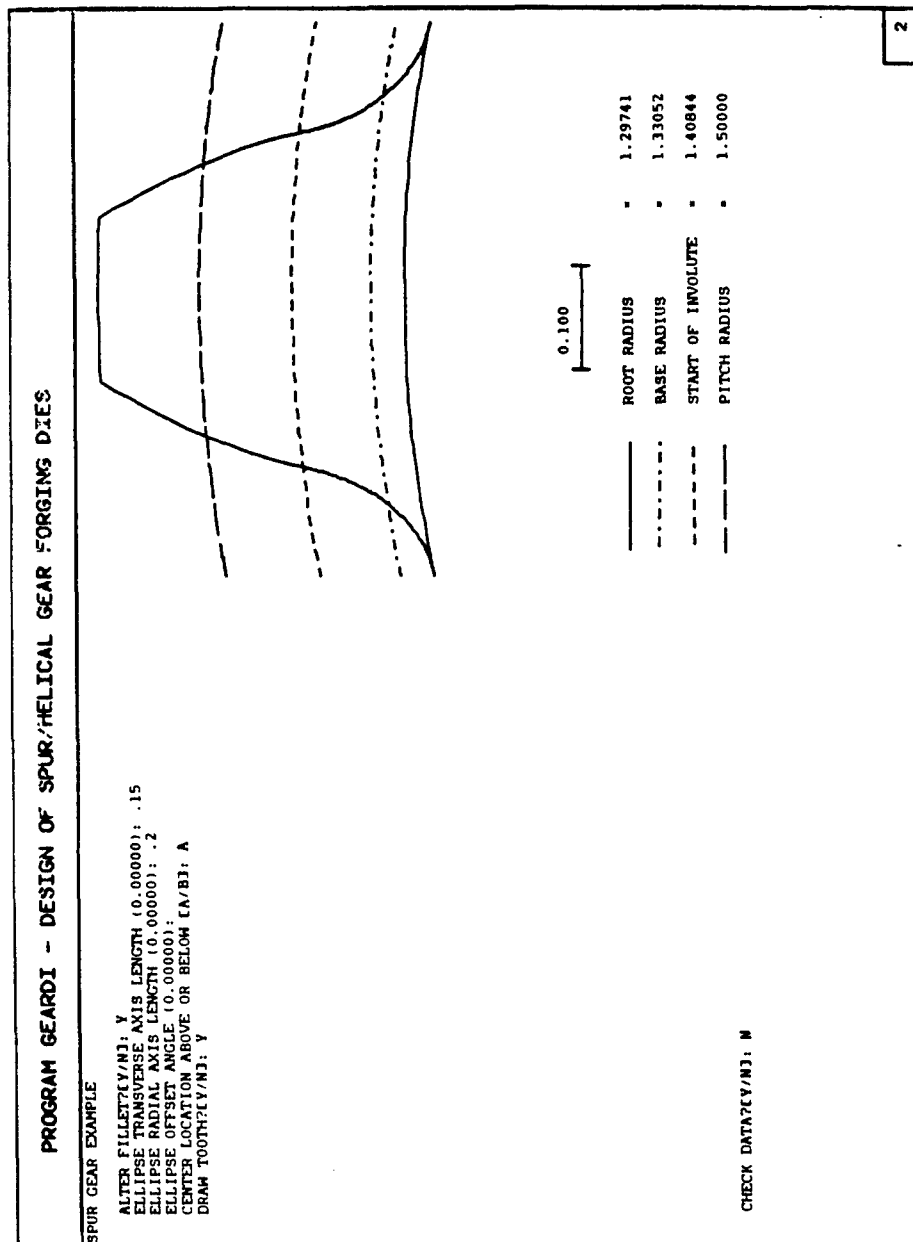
Spur Gear Example; Display of Gear Tooth with Altered Fillet
